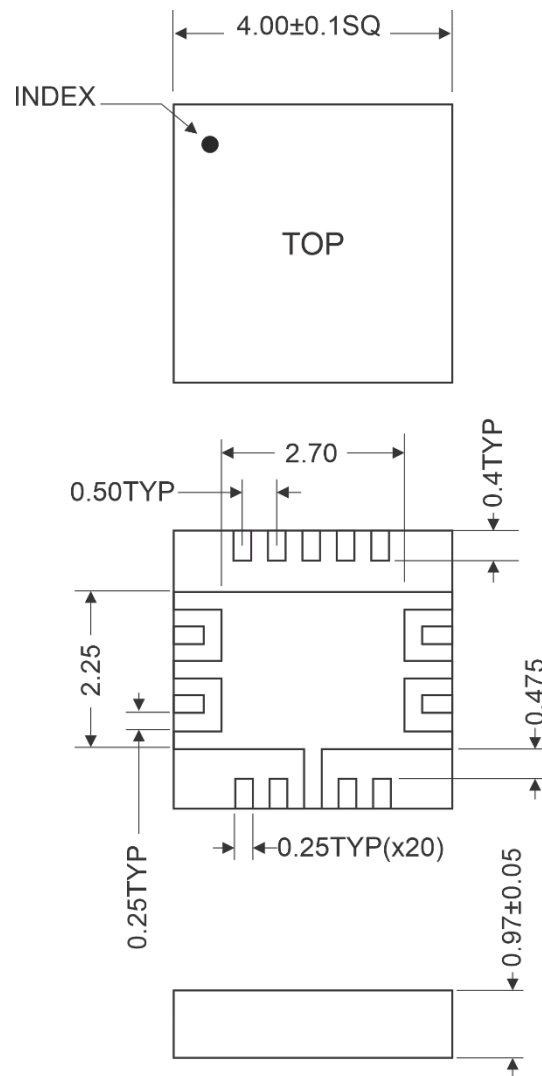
TPS002-X-QN package outline, dimensions in mm.
